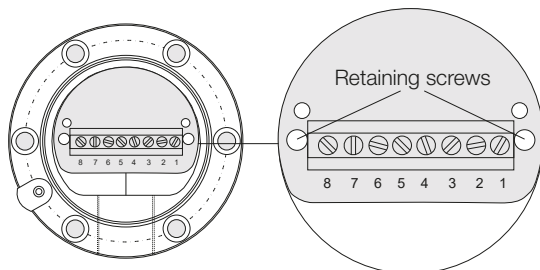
Typical housing with connection terminal assembly, pin assignment
